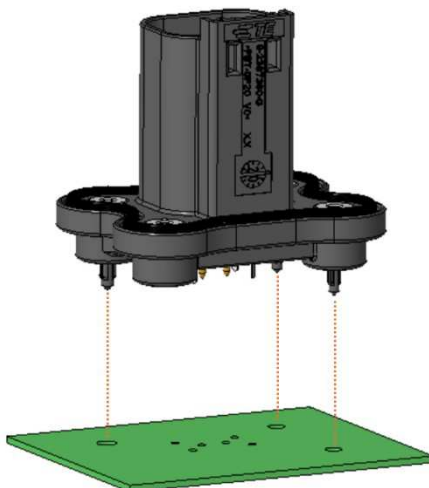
a: DT Highspeed 180 Degree Header orientation and positioning to the PCB
